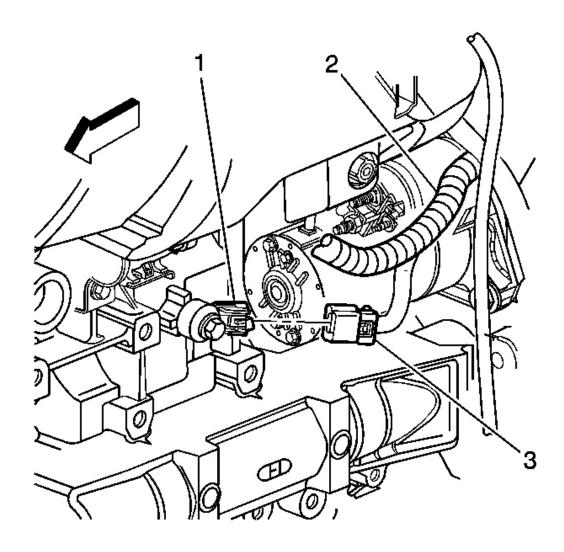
View Of KS Engine Wiring Harness Connector Courtesy of GENERAL MOTORS CORP.
